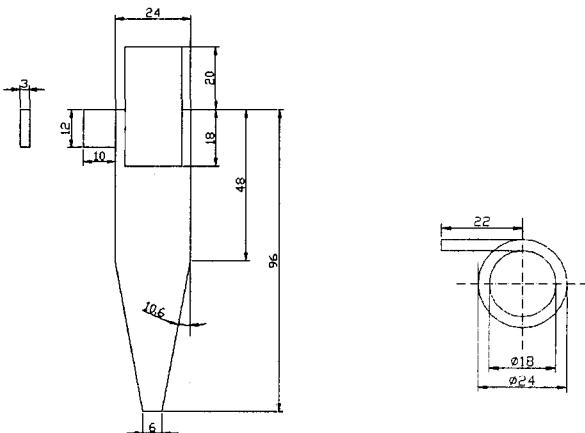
Dimensions and geometry of the cyclone with large outlet diameter
